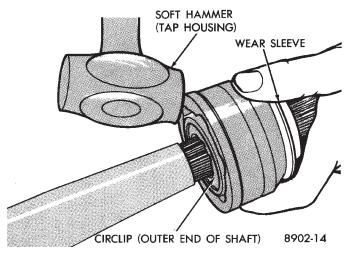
Outer C/V Joint Removal from Interconnecting Shaft
